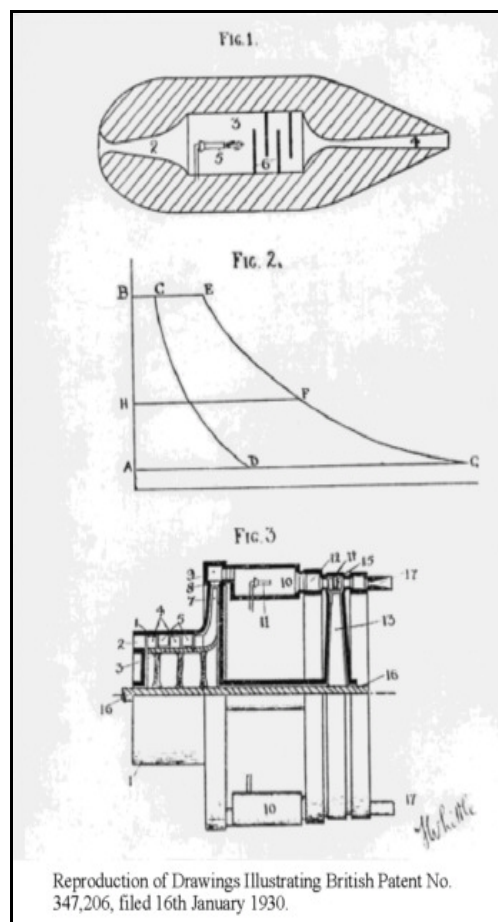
Sir Frank Whittles Patent Drawings.[2]
